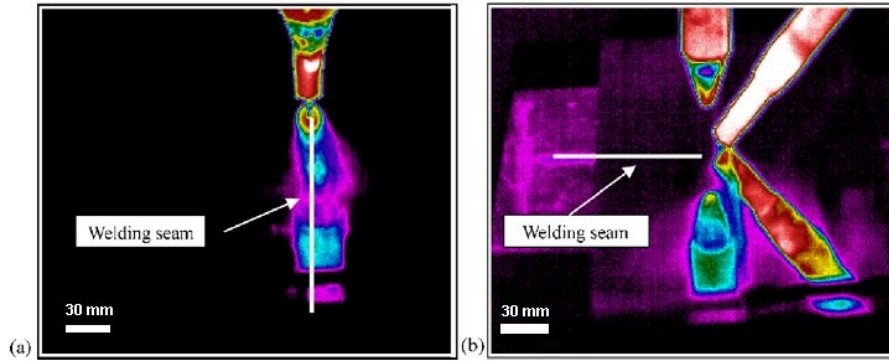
IR images captured (a) parallel and (b) perpendicular to the direction of welding seam during AZ31 hybrid laser-TIG welding process [24].
